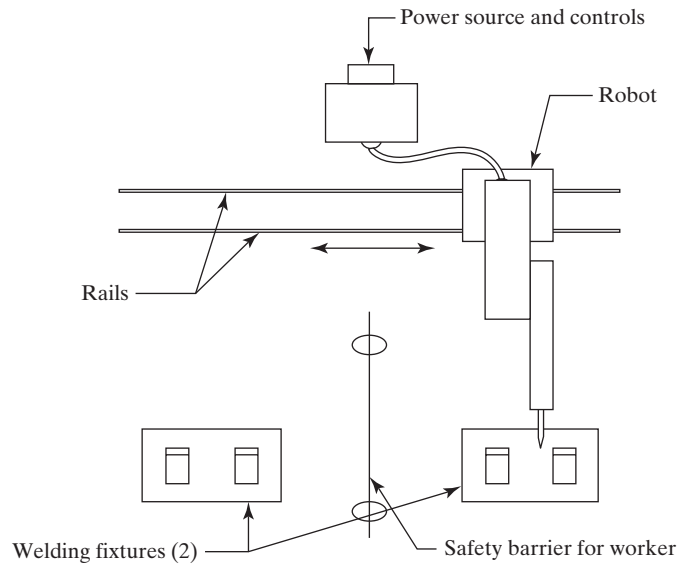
Robot arc welding cell in which the welding robot moves between welding fixtures on rails. A worker unloads the completed weldment and loads parts into one fixture while the robot performs the welding cycle at the other fixture.
